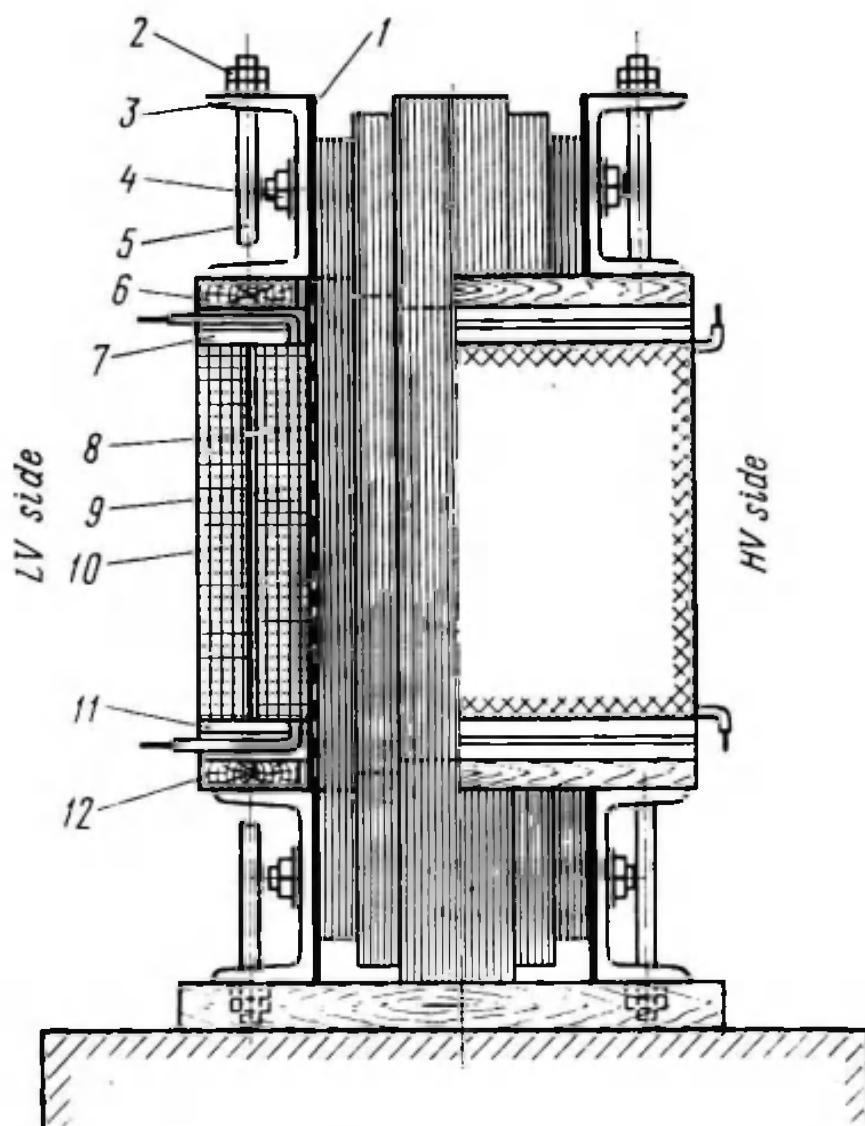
Core-coil unit of a Size II transformer (side view)
